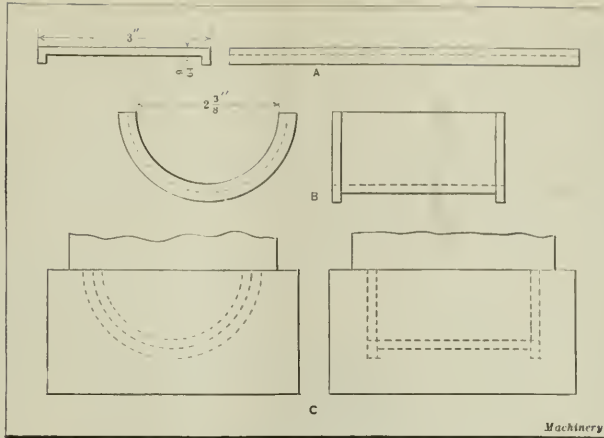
Diagrams showing Successive Operations in forming Flanged Bronze Bushings
